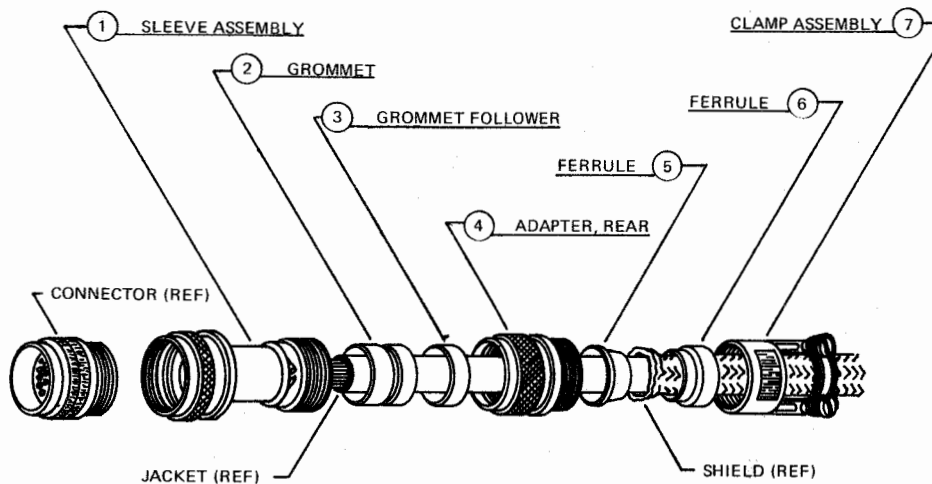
Style 1 - Type A Armor Environmental Backshell Assembly Breakdown
